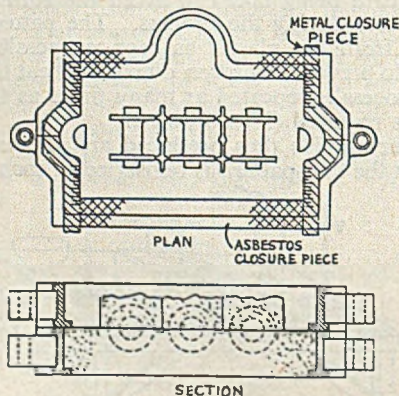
(upper) Bottom Half-mould, showing Position of Runners; (lower) Section of Closed Mould.
